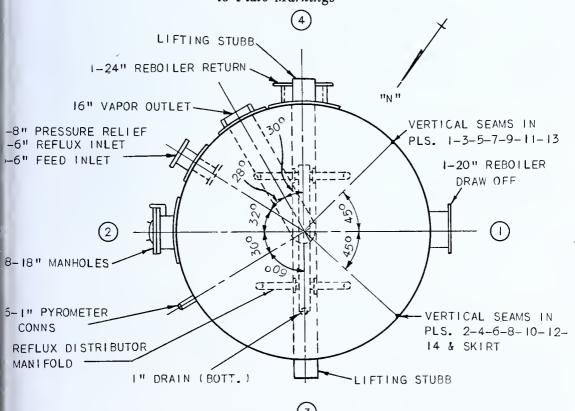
Cylindrical Tank Assembled to Lead Lines According to Plate Markings
